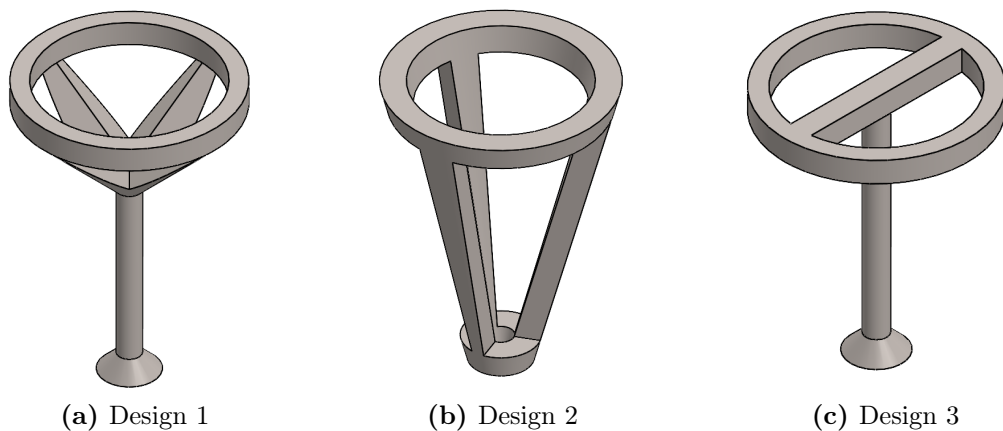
The three initial TORP designs for SLM manufacturing method. Design 1 consists of an annular head and a circular foot with a bifurcated shaft; Design 2 has annular head and foot with a tapered shaft; Design 3 contains an annular head and a circular foot with a straight shaft.
